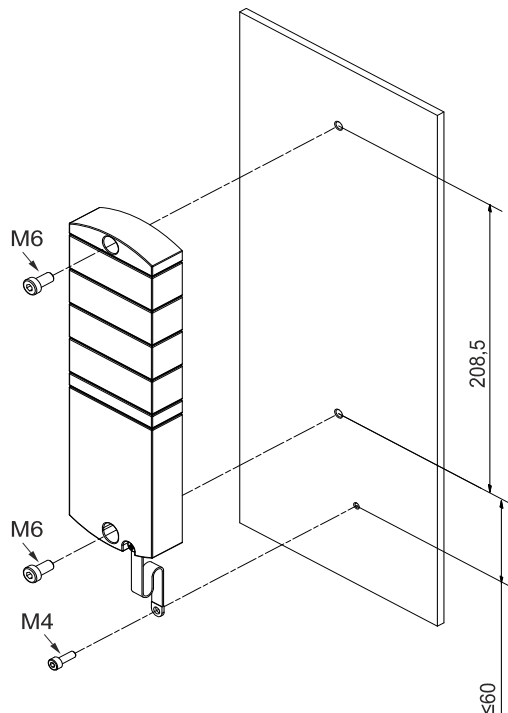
Fasten device. Dimensions in mm (figure similar)
